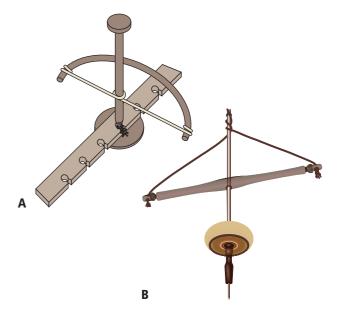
Examples of the earliest hand-powered machine tools. (A) The bow drill; and (B) the pump drill.
